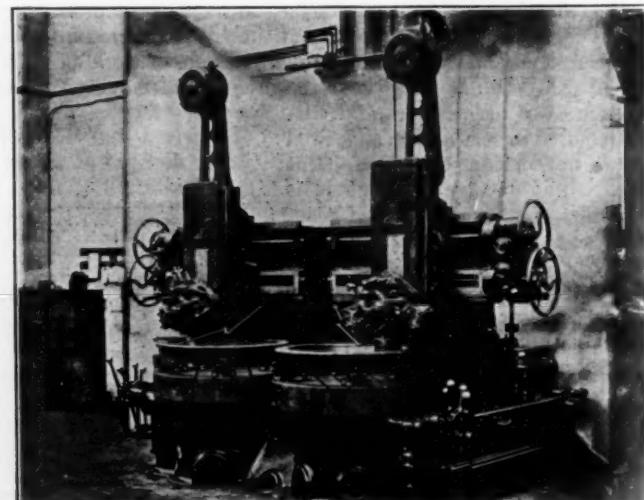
DUPLEX BORING MILL MACHINING CAR-WHEEL TIRES
